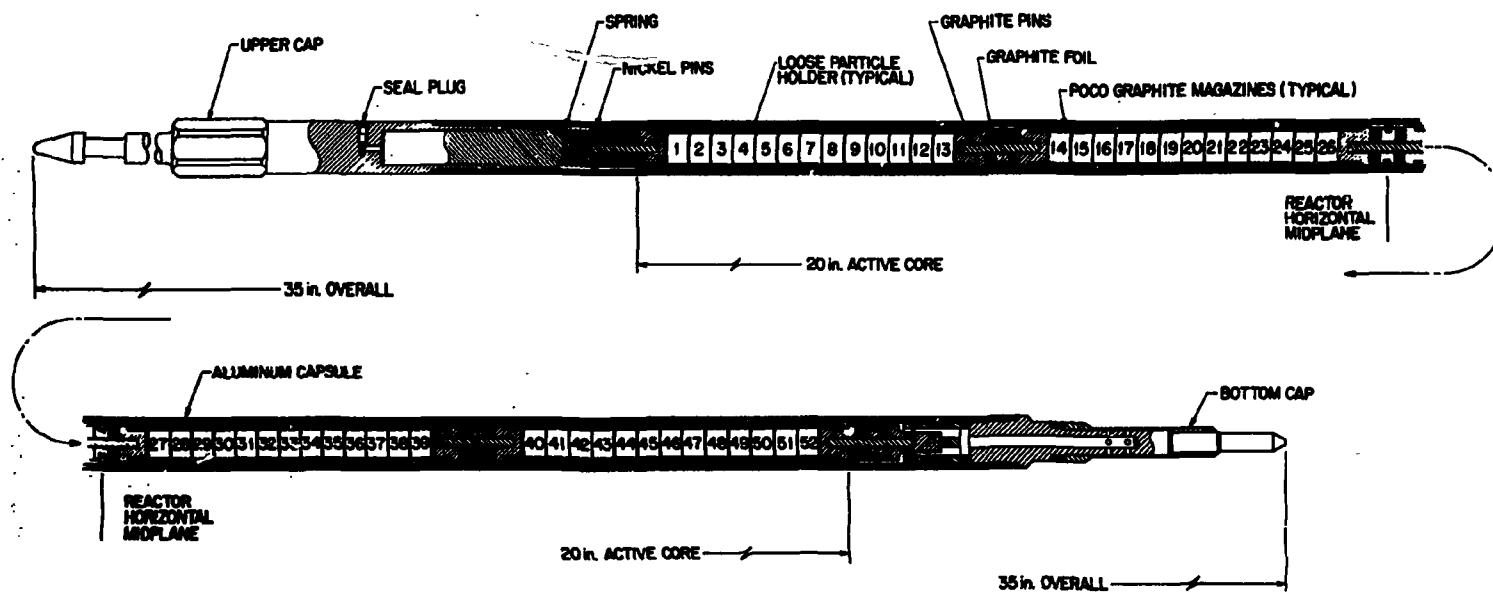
The HT-34 Capsule Design (1 in. = 25.4 mm).
